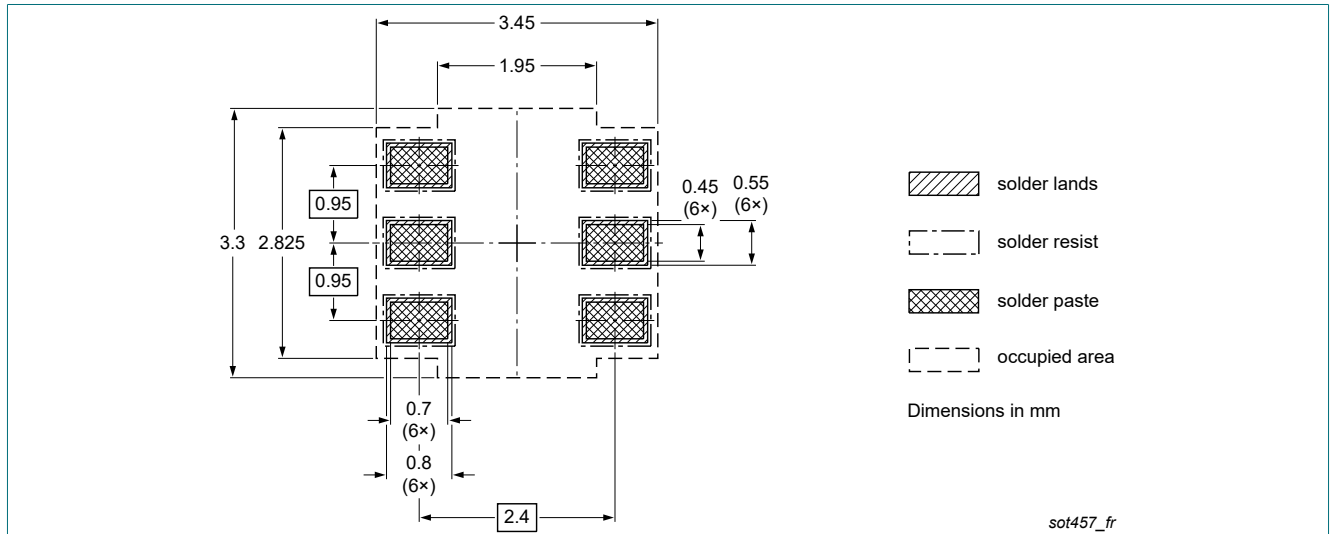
Reflow soldering footprint for SC-74; TSOP6 (SOT457)
